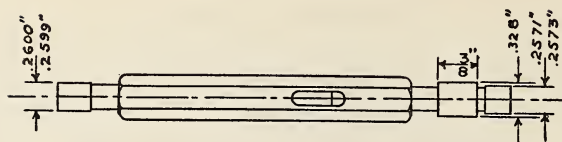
“Go” and “not go” gage for depth of threaded recess, and shank bore, A size.
